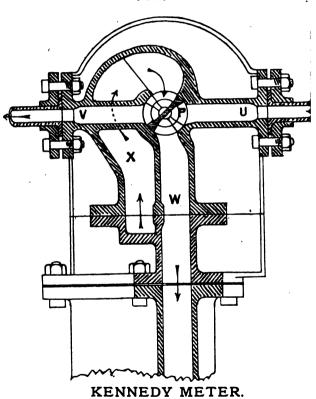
is a side section through the center shaft, cock-key, and piston.
